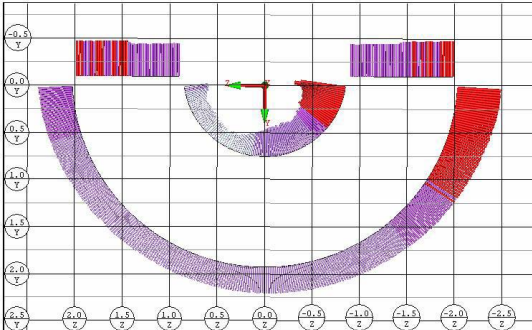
Coordinate measuring machine inspection of 2 m impregnated coil.
